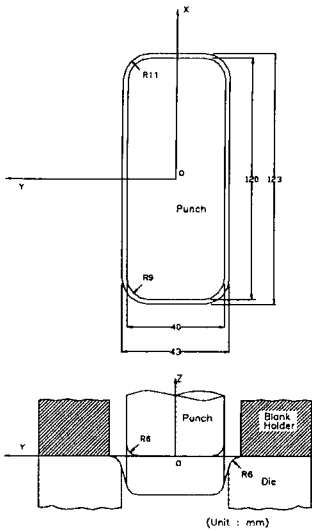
Schematic view of the deep drawing process of a rectangular cup
